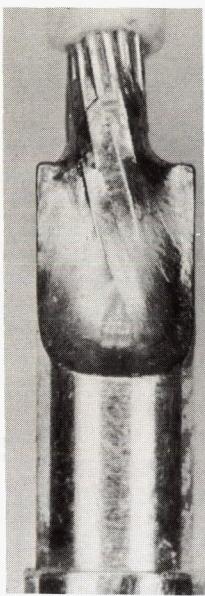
Soldered Connection Inspection Criteria
